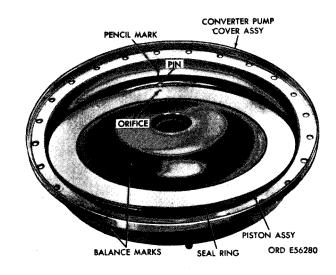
Positioning lockup clutch piston assembly for installation.
